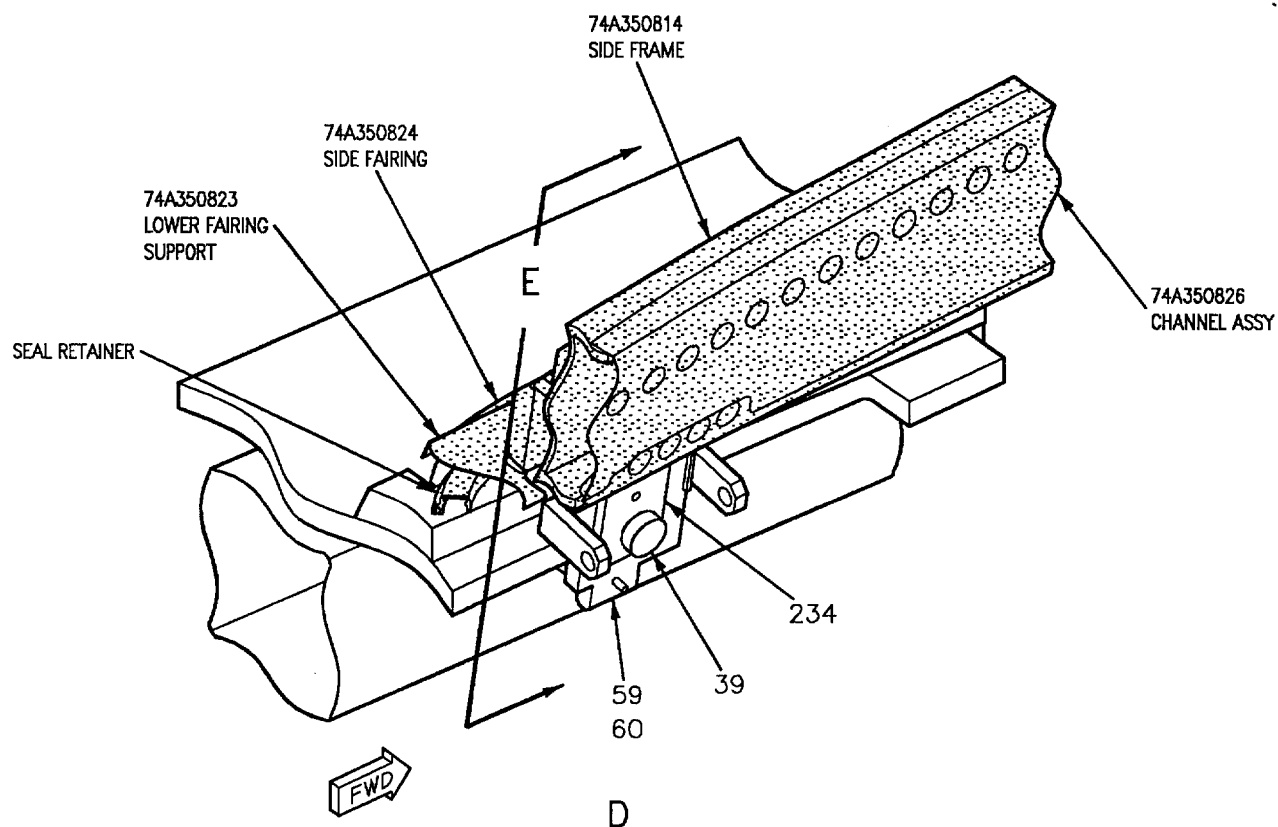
Replacement - Latch No. 6 (Sheet 3)
